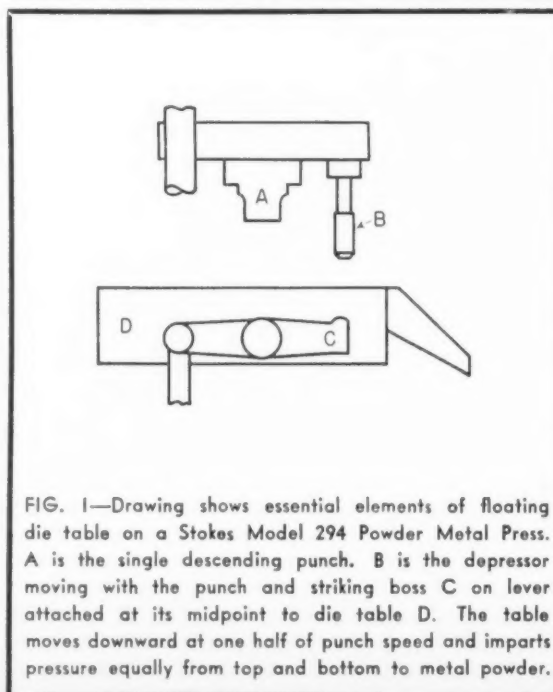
Drawing shows essential elements of floating die table on a Stokes Model 294 Powder Metal Press. A is the single descending punch. B is the depressor moving with the punch and striking boss C on lever attached at its midpoint to die table D. The table moves downward at one half of punch speed and imparts pressure equally from top and bottom to metal powder.
